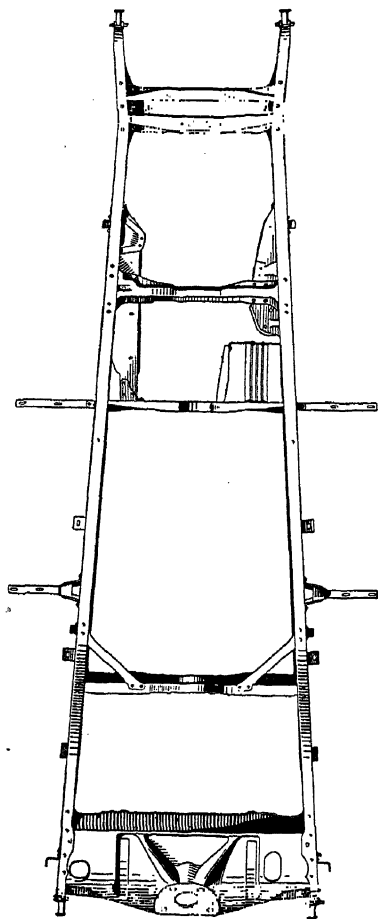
Plan View of Earlier Type 20 h.p. Car Frame for rigid engine mounting.
